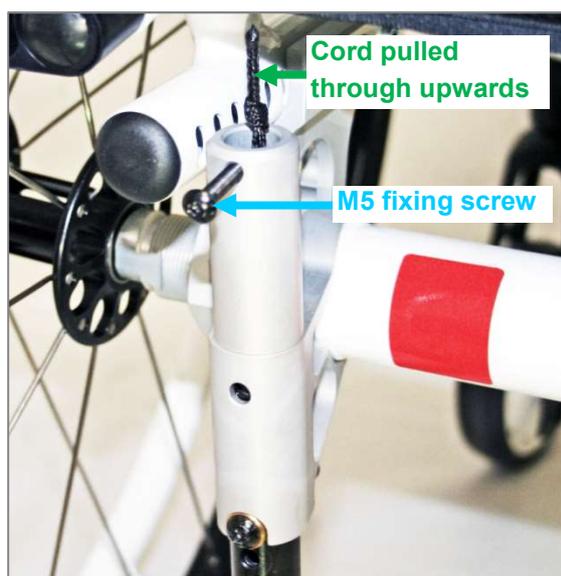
Spring retention cap placed on the anti-tipping support adapter, cord pulled through upwards and M5 fixing screw inserted
